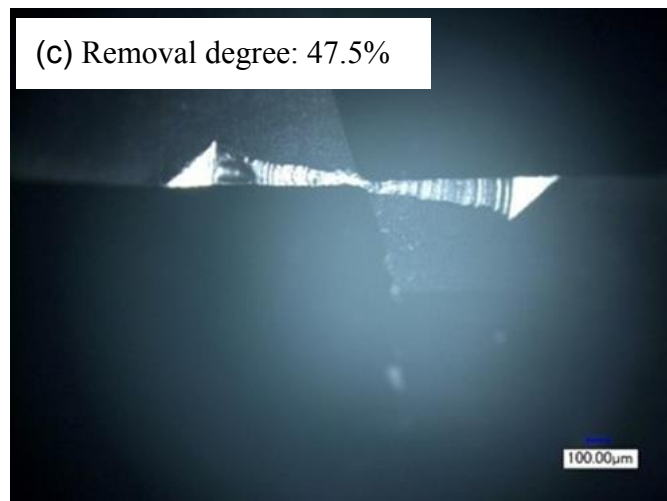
Images of flank face of ball end mill at different removal degree.
